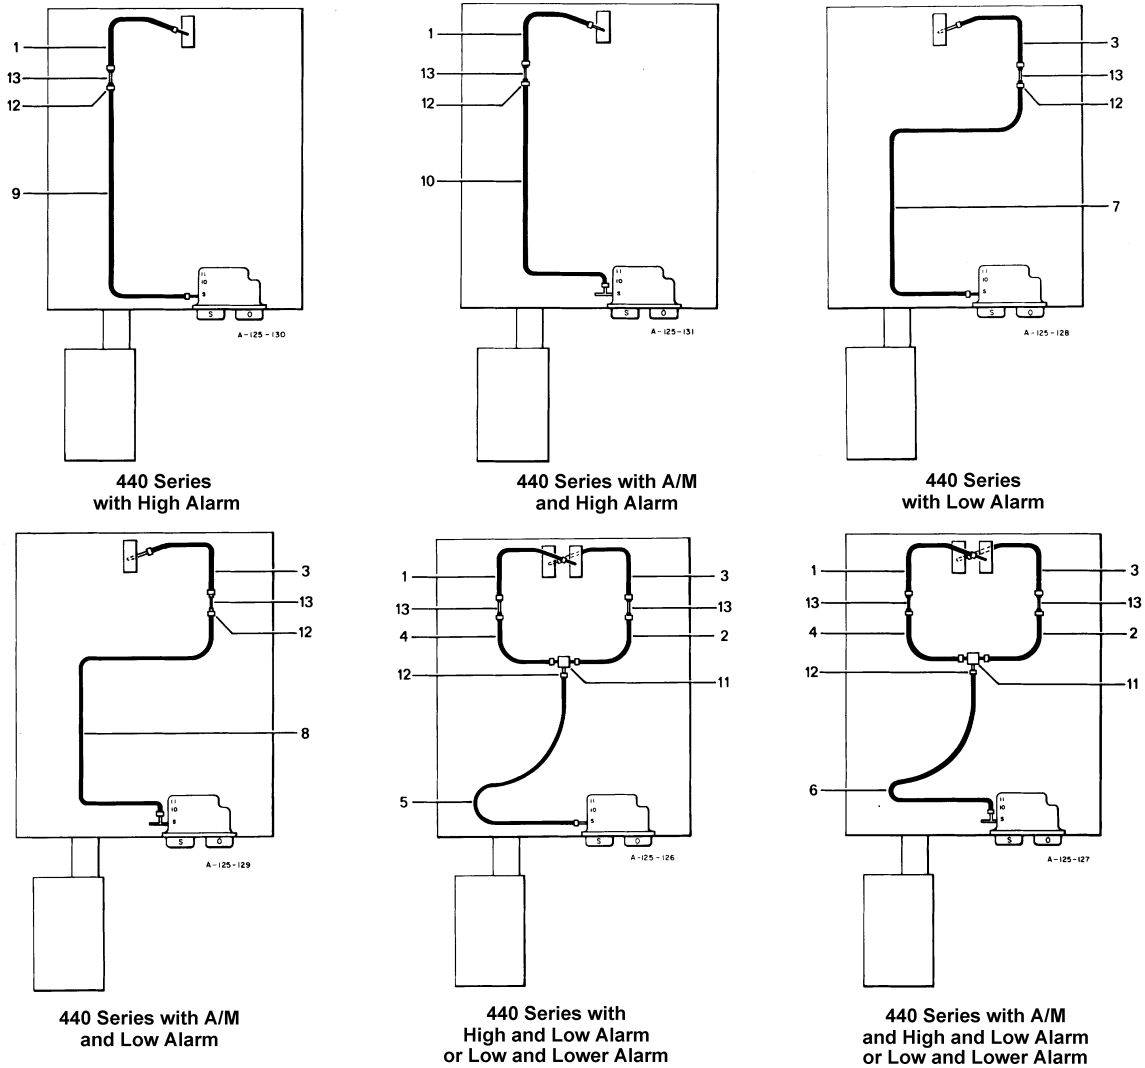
Primary Actuated Alarms Air Tubes Parts View
